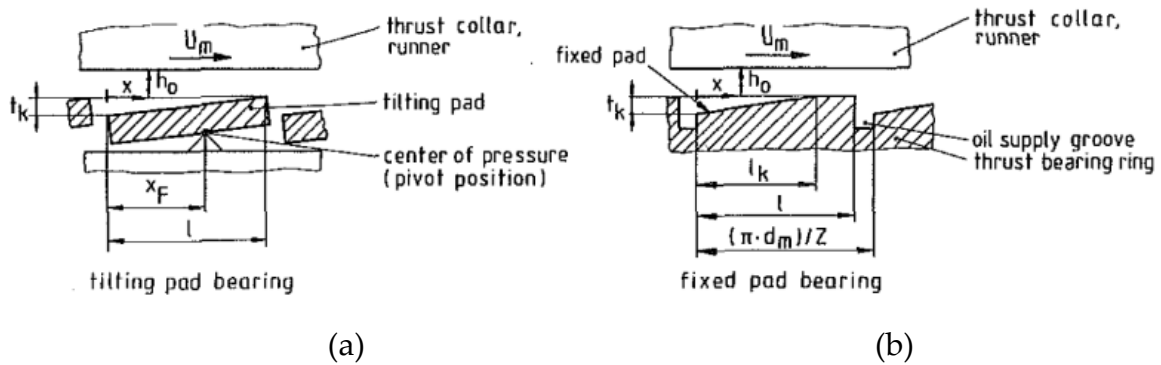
Geometry of: (a) tilting pad bearing; (b) fixed pad bearing
